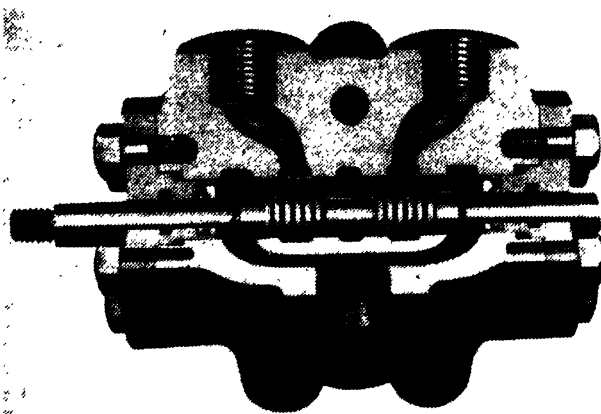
Operating valve. (*Hydro-Power Inc., Mount Gilead, Ohio.*)
